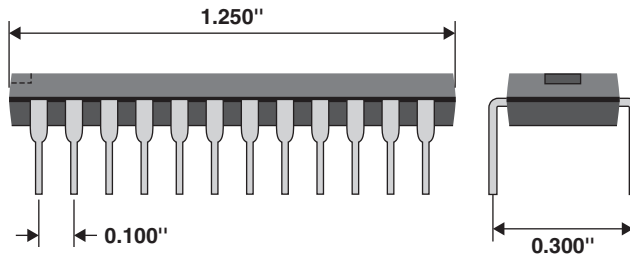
A 24-pin dual in-line package (DIP-24) and its dimensions.
